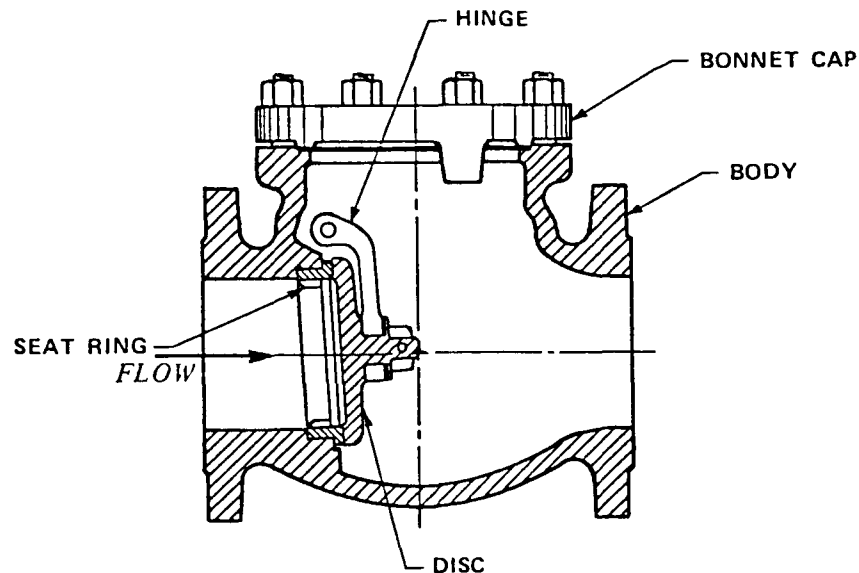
TYPICAL SWING CHECK VALVE
